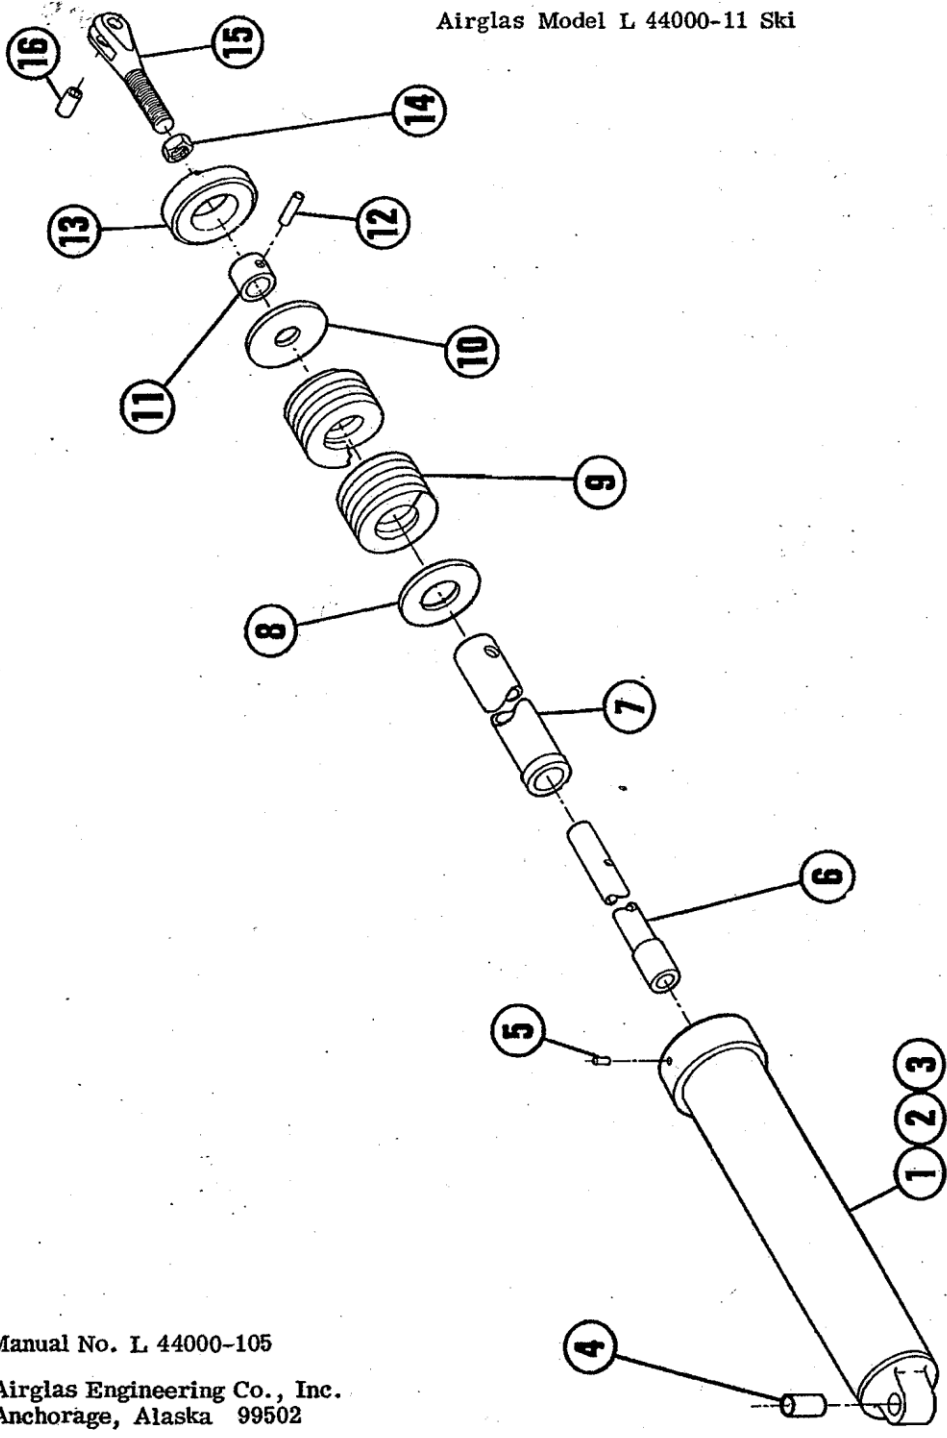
P/N L 44000-17 Spring Cylinder Assy. Fwd. - Exploded View
